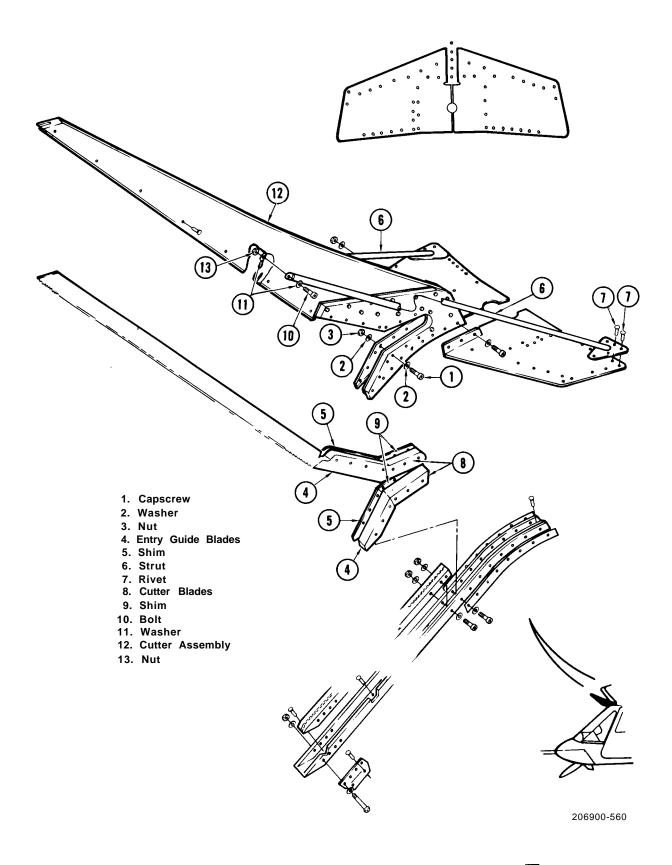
Removal - Strut Assembly, Cutter Blades
